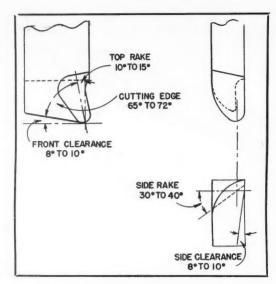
Drawing of Finishing Tool for Use in Machining Aluminum
